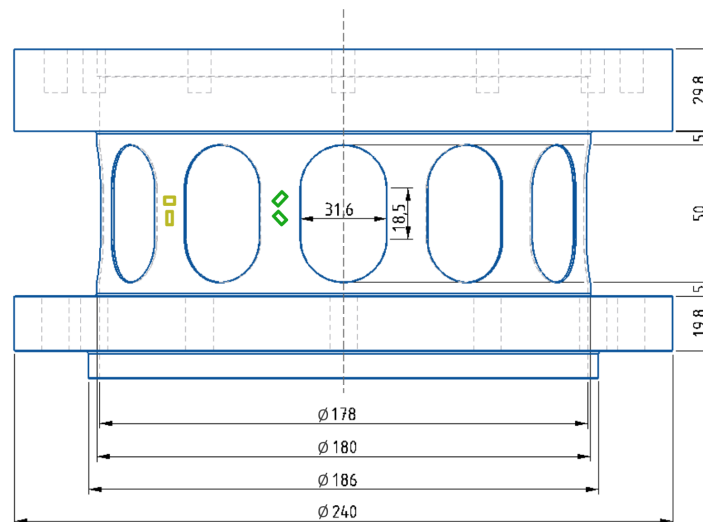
The final and recommended design of the measuring device with dimensions in millimeter. The placement of the axial load measuring strain gauges is represented by the yellow squares, and the placement of the friction torque measuring strain gauges is represented by the green squares.
